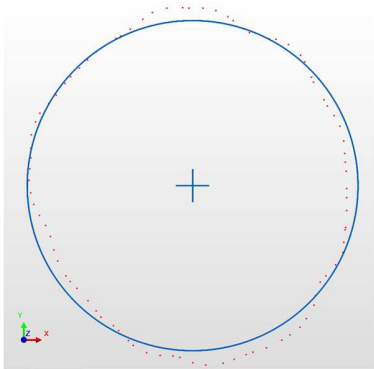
0.2 mm hole (sample 1 of the test 4)
